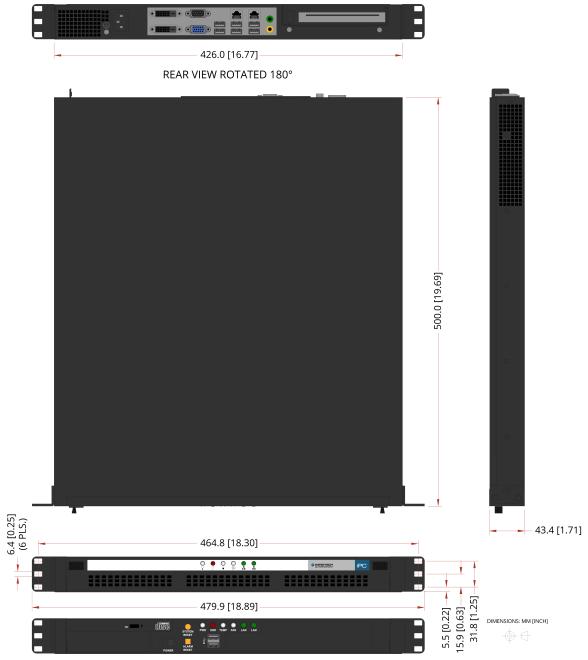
1U Rack Mount Chassis Dimensions (-R103)
